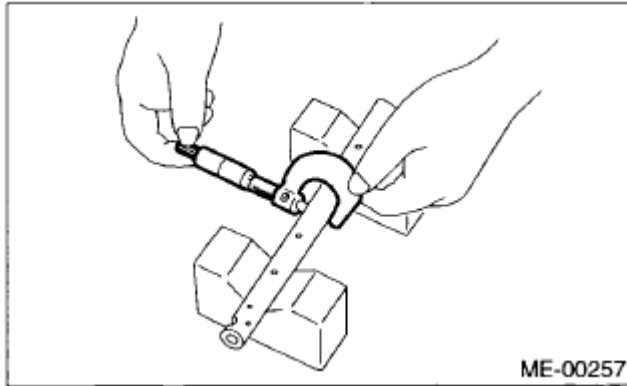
Measuring Outer Diameter Of Valve Rocker Shaft
